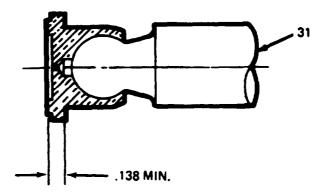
Piston Shoe Rework Tolerance.
